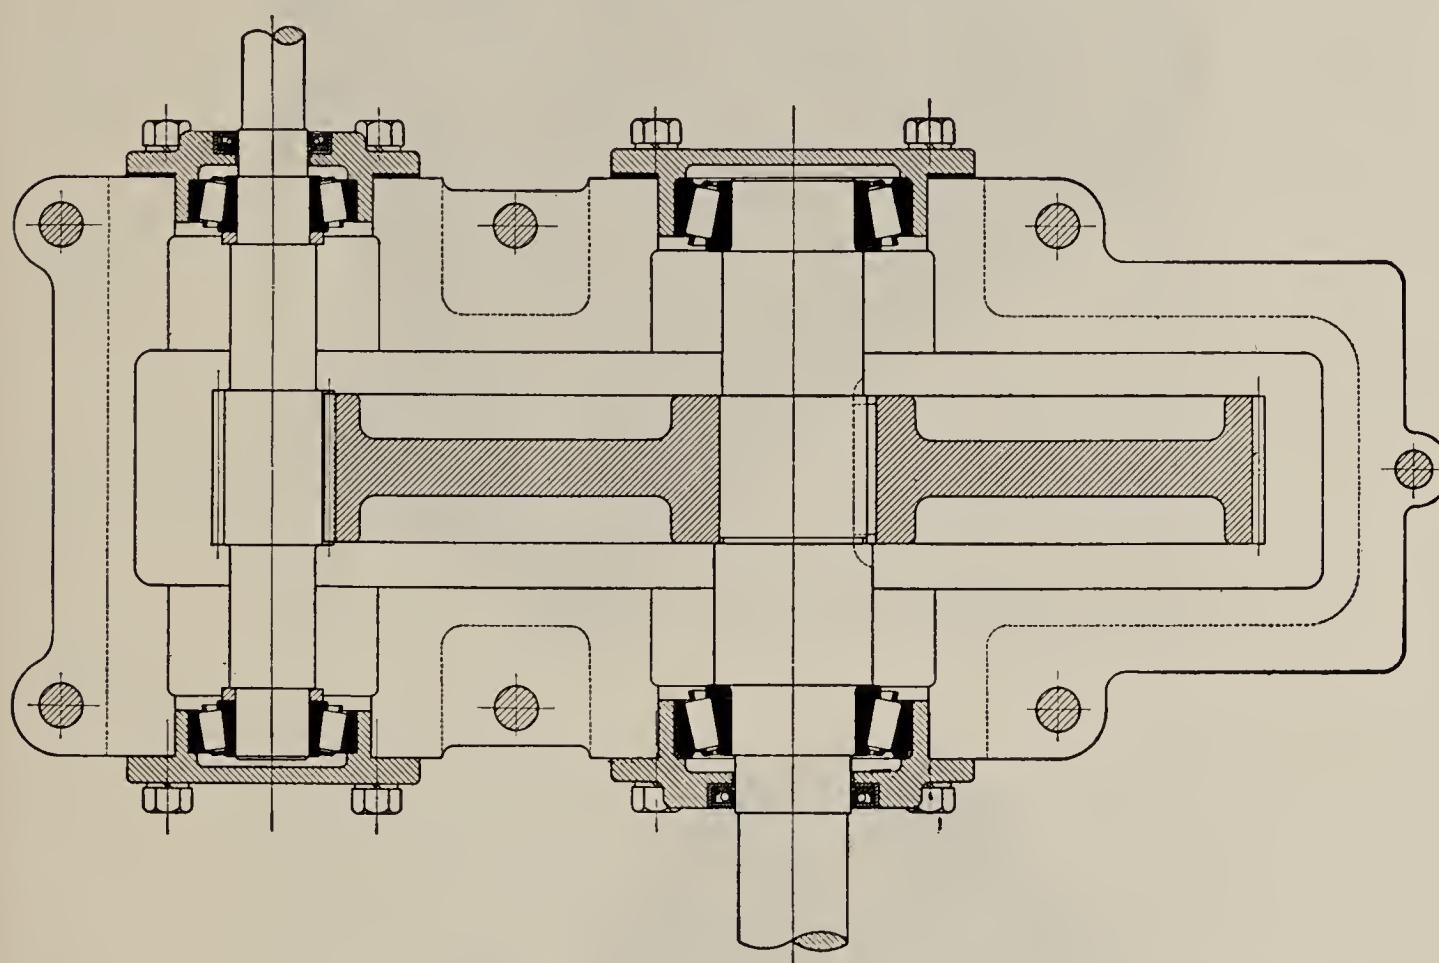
Section of helical-gear speed reducer. (*Courtesy of Timken Roller Bearing Company.*)
